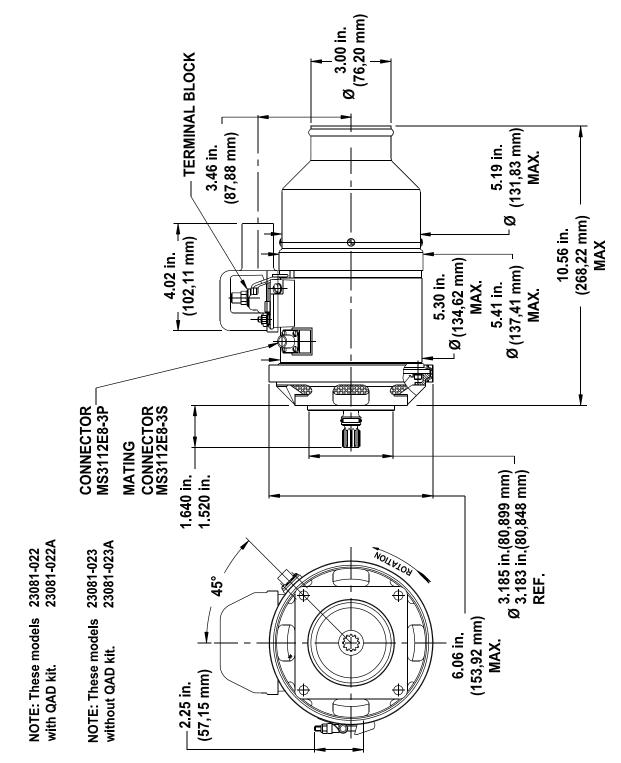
Outline Drawing 23081-022, -022A, -023, -023A
